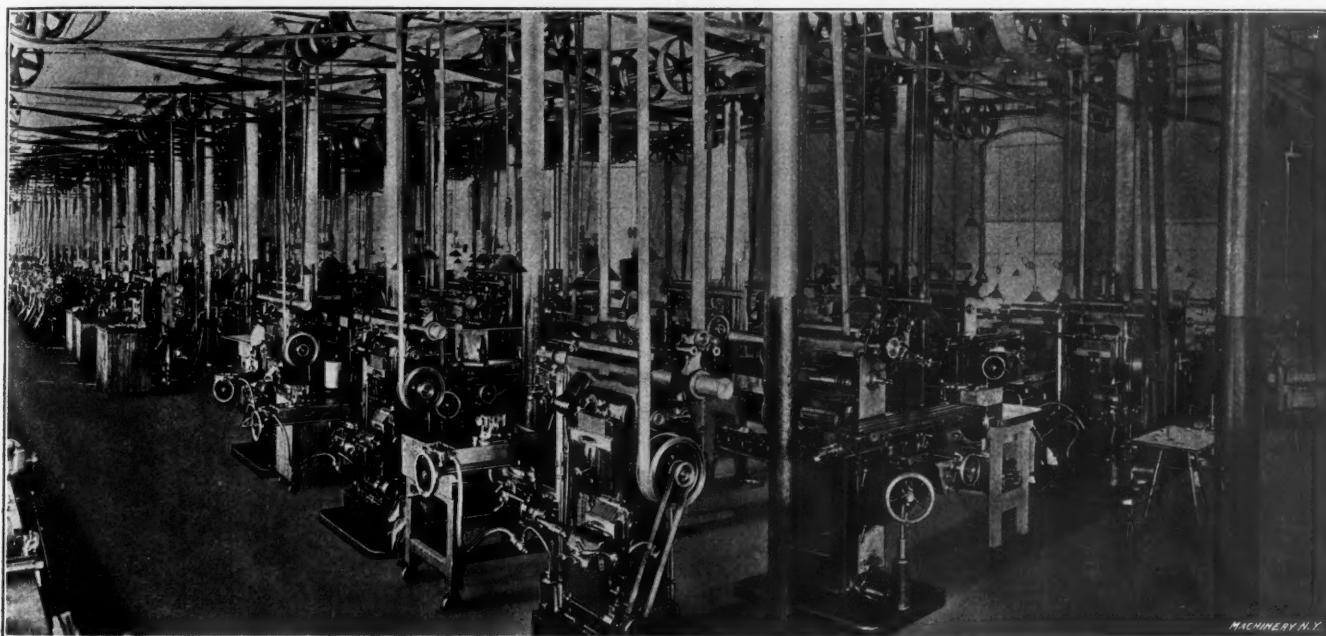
View of Taft-Peirce Mfg. Co.'s Tool-room, showing General Milling Division in the Foreground
